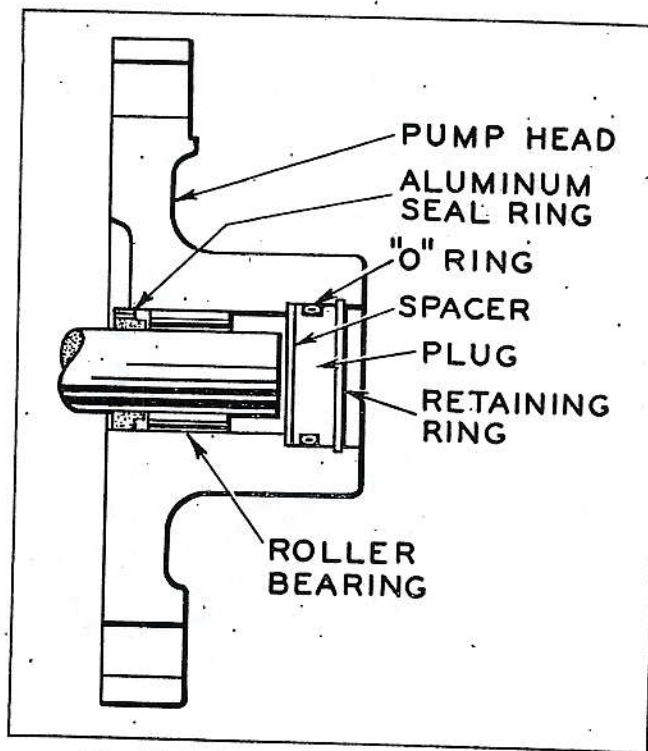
Assembly of Roller Bearing and Bearing Seals
